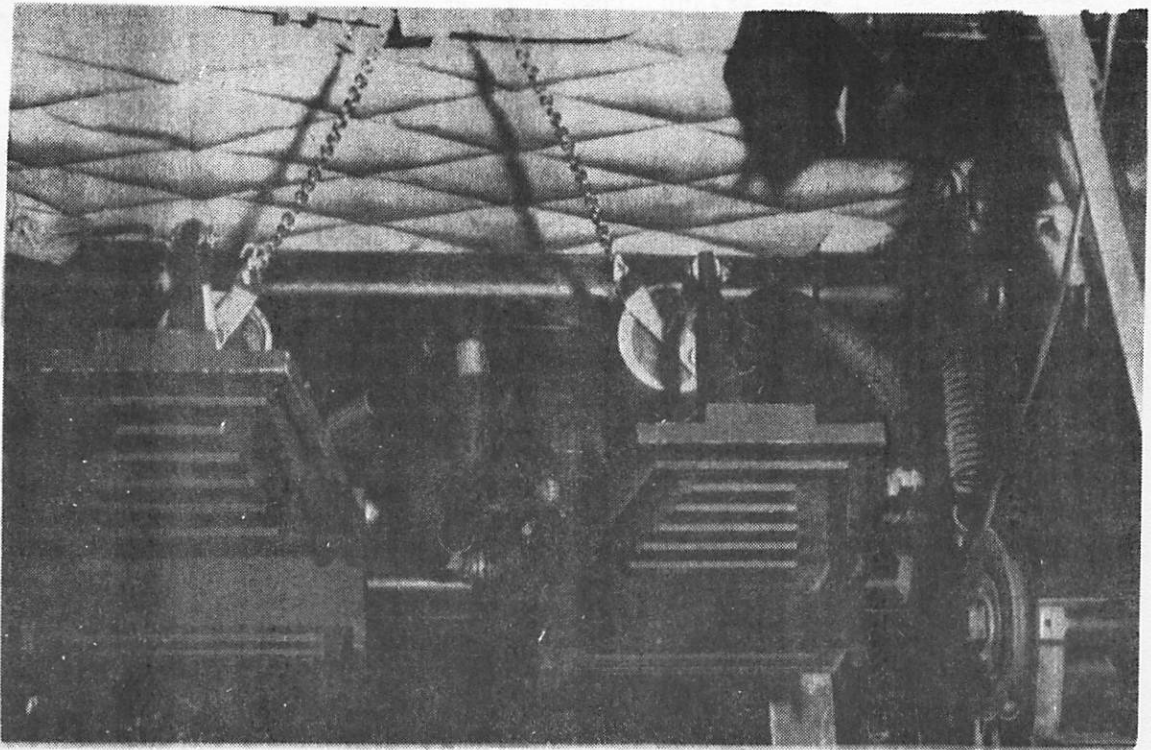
Master Cylinders and Parking Brake Assemblies - Pilot Side
